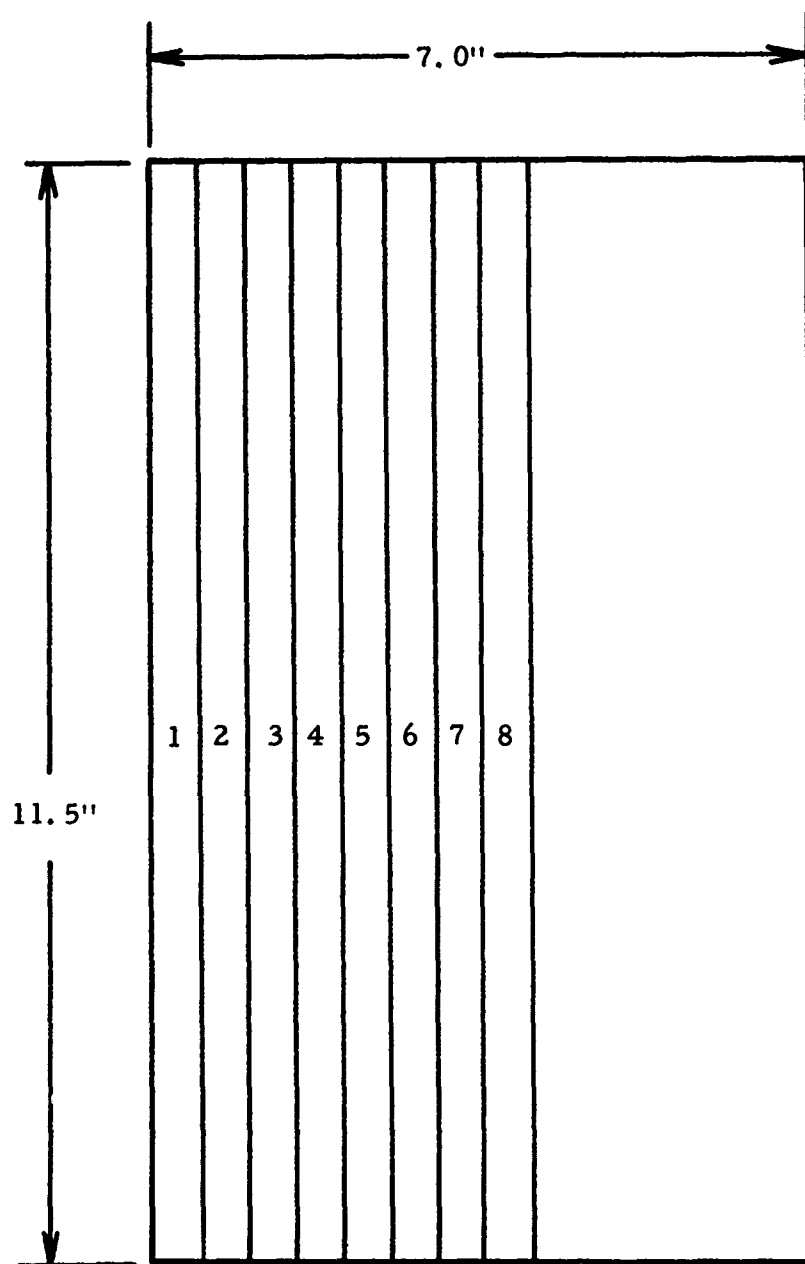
Tensile Strip Specimen Cutting Plan for Sheets:
